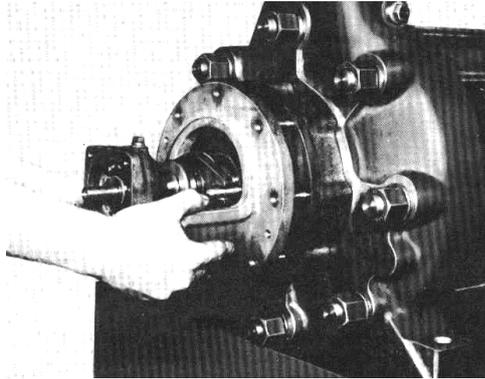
Removing the bearing housing (350) together with outer race of cylindrical roller bearing (322)
